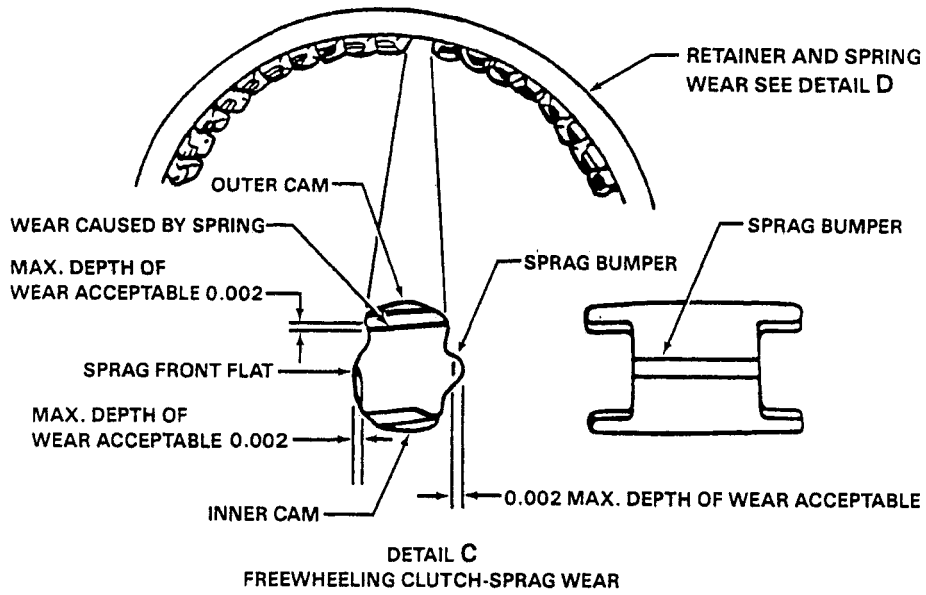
Freewheeling clutch inspection (Sheet 3 of 3)
